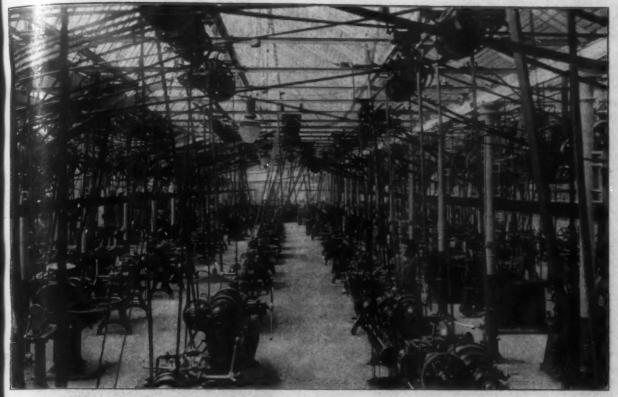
View Showing the Installation of Machine Tools at the Melnotte Works.
